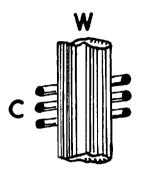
Drawing of a hollow copper coil C surrounded by a work piece W - an internal coil.
